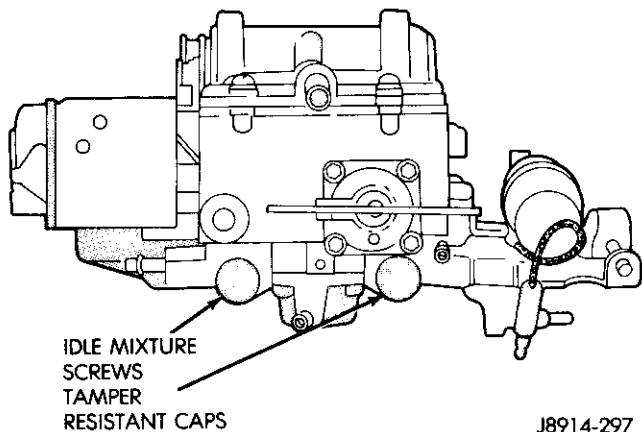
Idle Mixture Screws Tamper Resistant Caps
